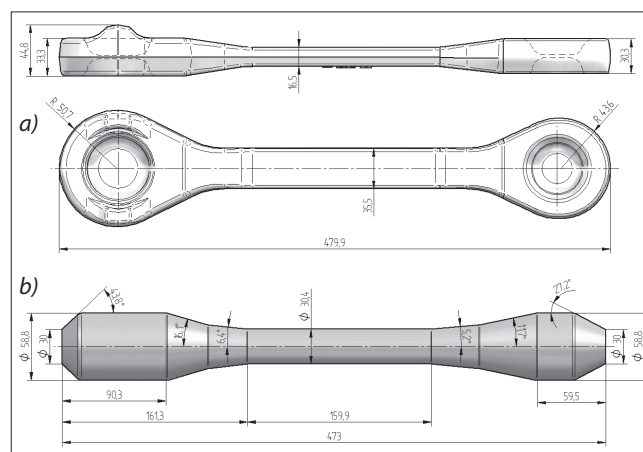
The lever forging (a) and the preform used to make it (b)
